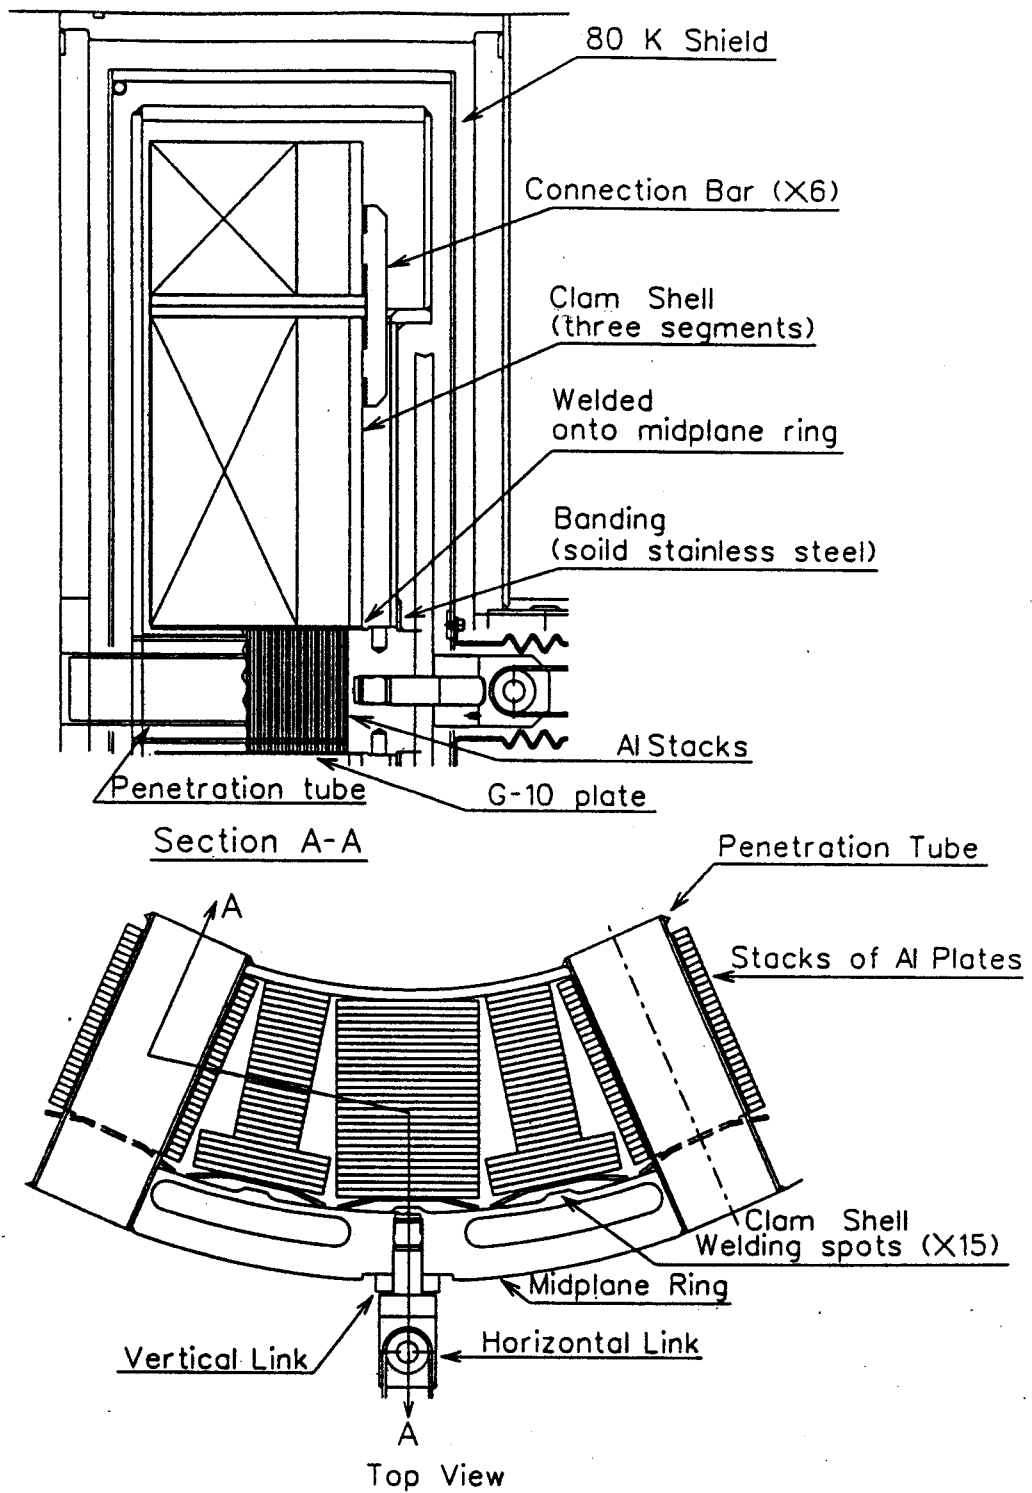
Top view of a section of the midplane structure, and a side view to show its attachment to the coil. There are twelve penetration holes.
